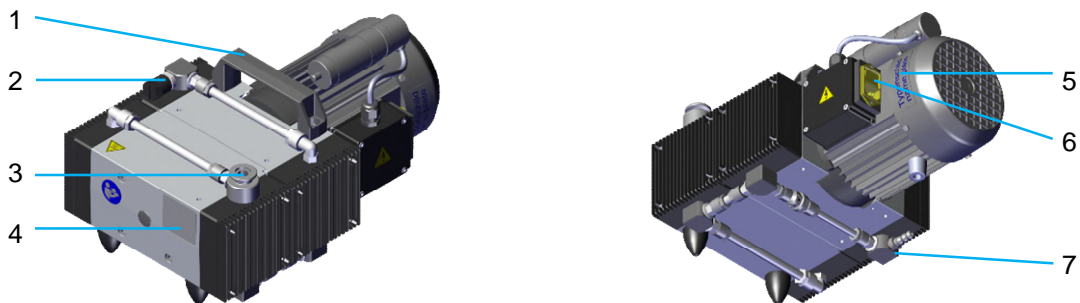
Model MPC 603 T, front (left) and rear (right) view
